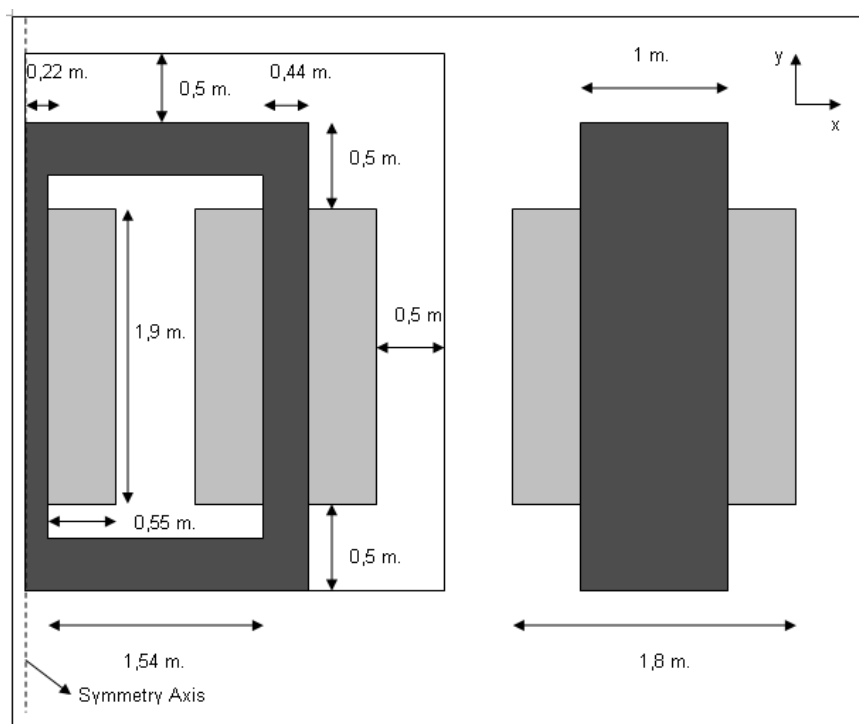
Cross section of the core and winding of the transformer from the front view and side view
